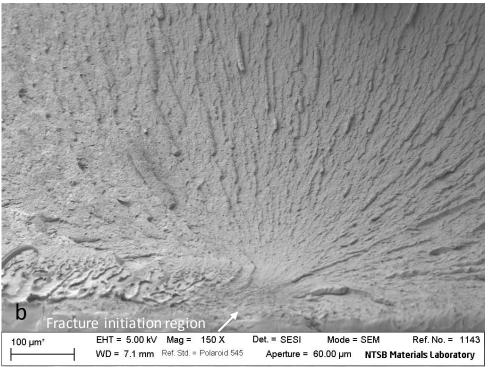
Scanning electron fractographs of the initiation region of the fracture in the distributor cap. In view a, the fracture initiated at the base of the step created by the identification boss molded into inner surface of the cap.
